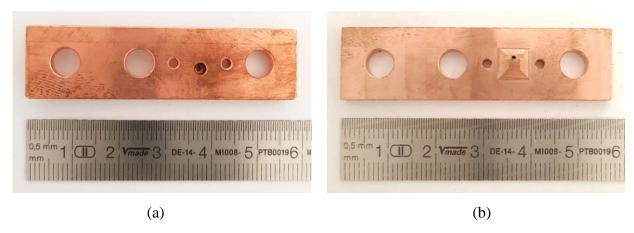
(a) Top and (b) bottom side views of cathode structure
